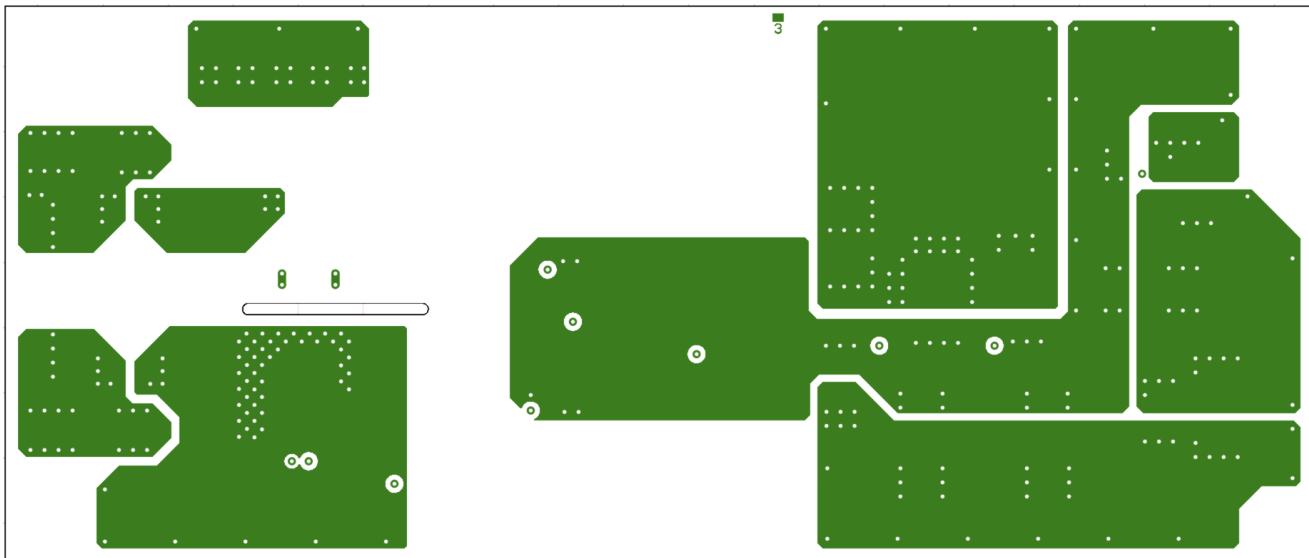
RDR-994Q Mid-Layer 3 PCB Layout.
